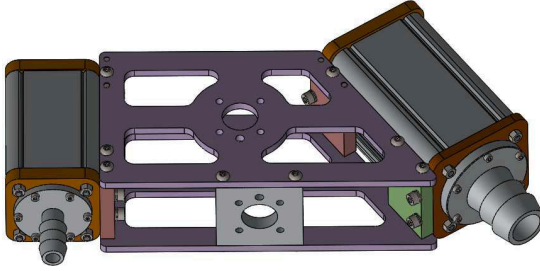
Back and superior fixing holes for auxiliary moving systems.
